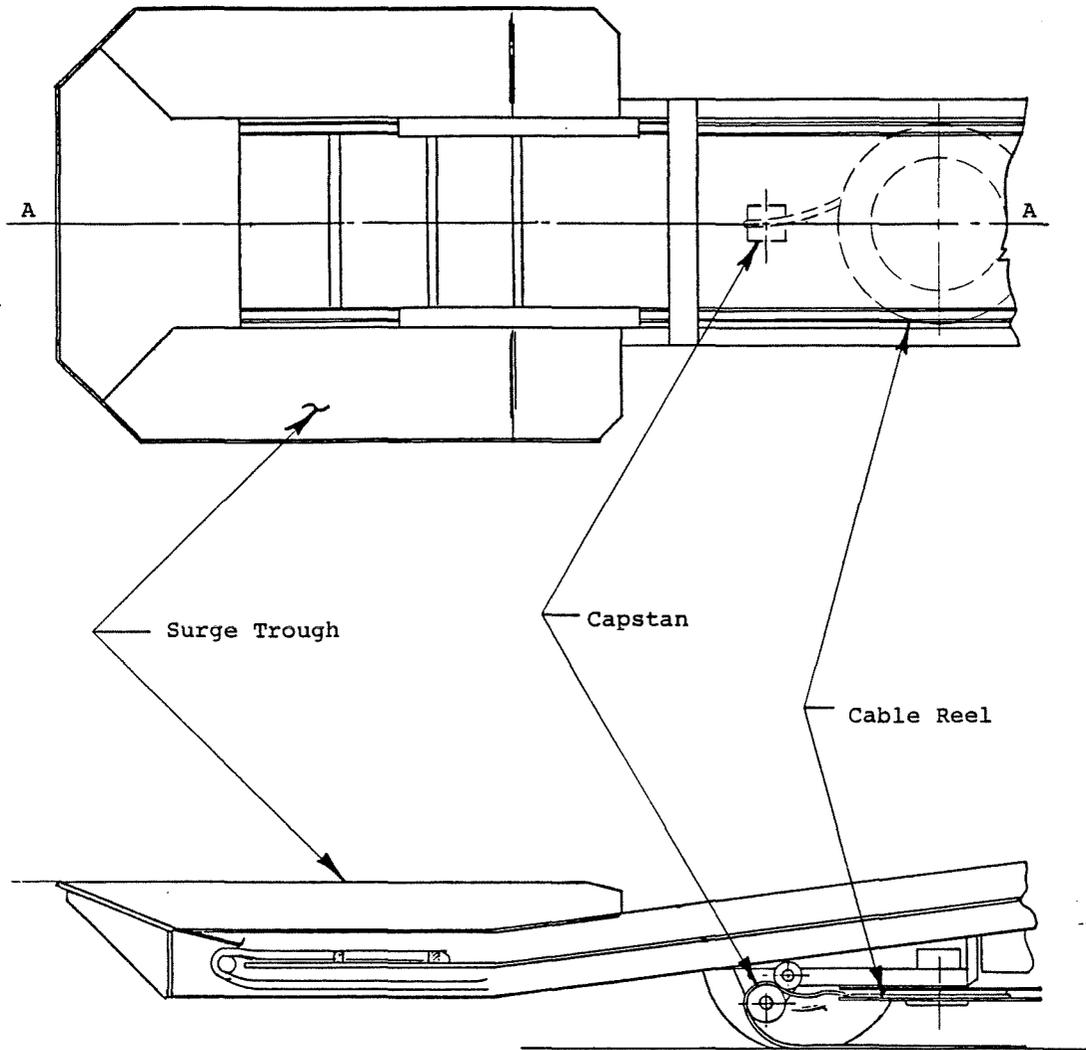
Modification of carrier inboard end to form lead unit.
